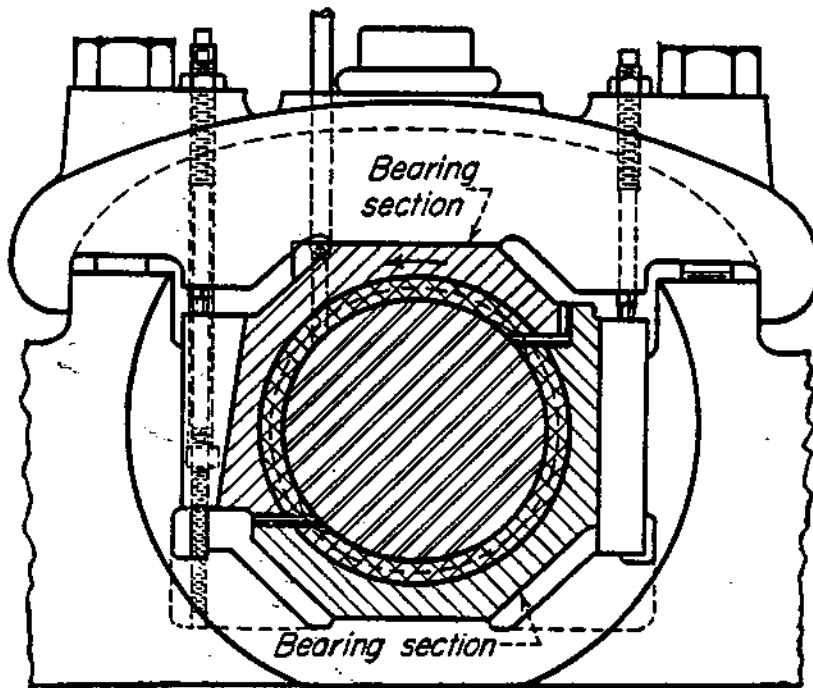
Two-part babbitted main bearing having the adjustment flexibility of a three- or four-part bearing.
